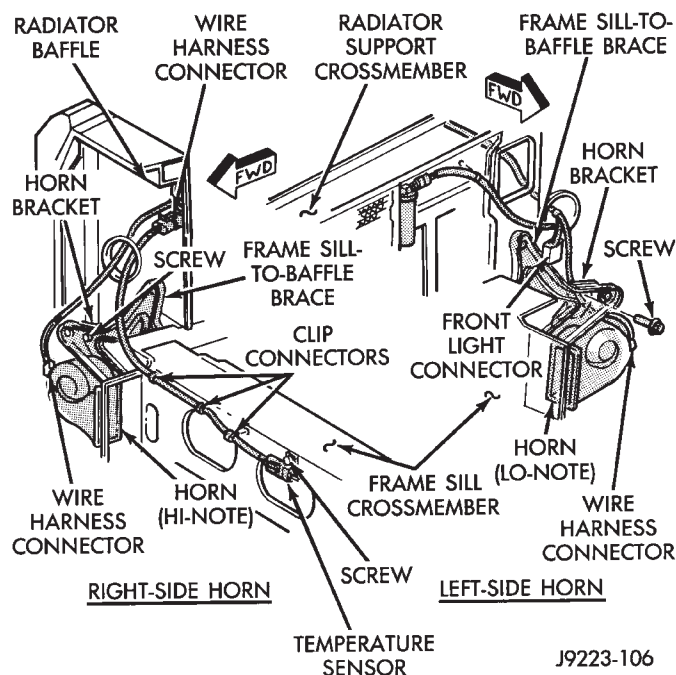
Horns, Baffle Braces & Wire Harnesses
